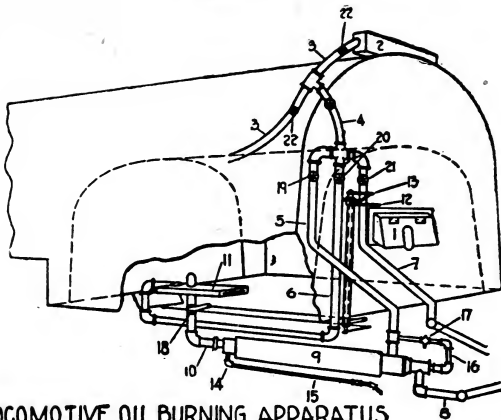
LOCOMOTIVE OIL BURNING APPARATUS
